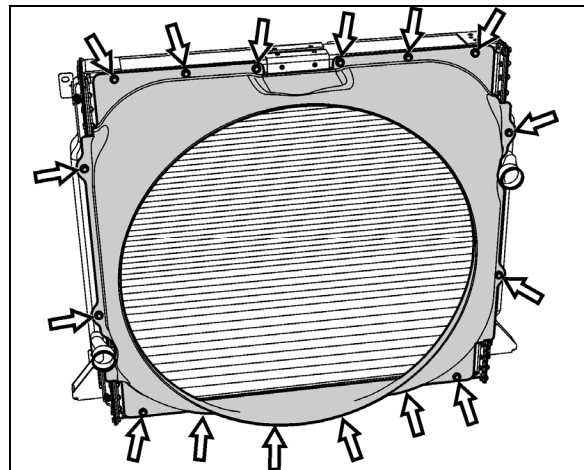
REMOVING FAN SHROUD FROM RADIATOR
